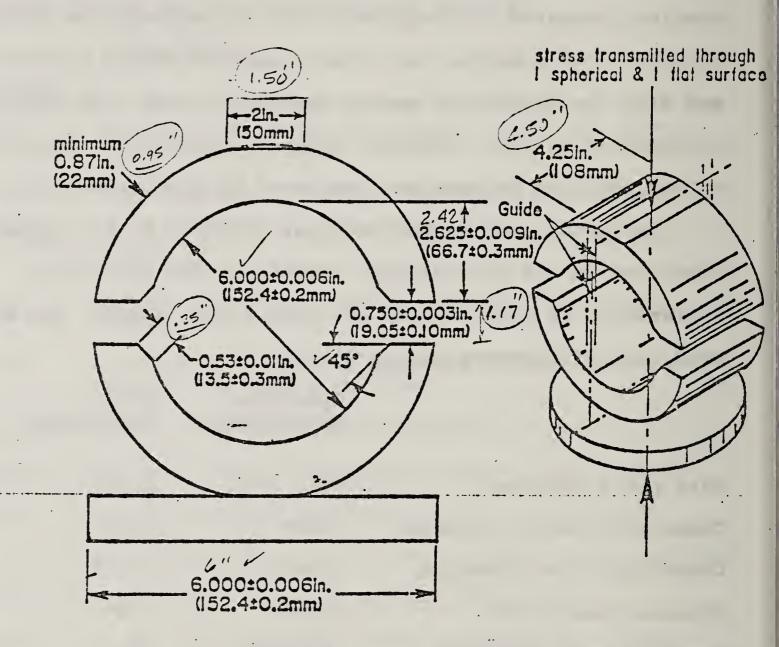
Diagram Illustrating the Dimensions of the Breaking Head for 6" Diameter Molded Specimen
